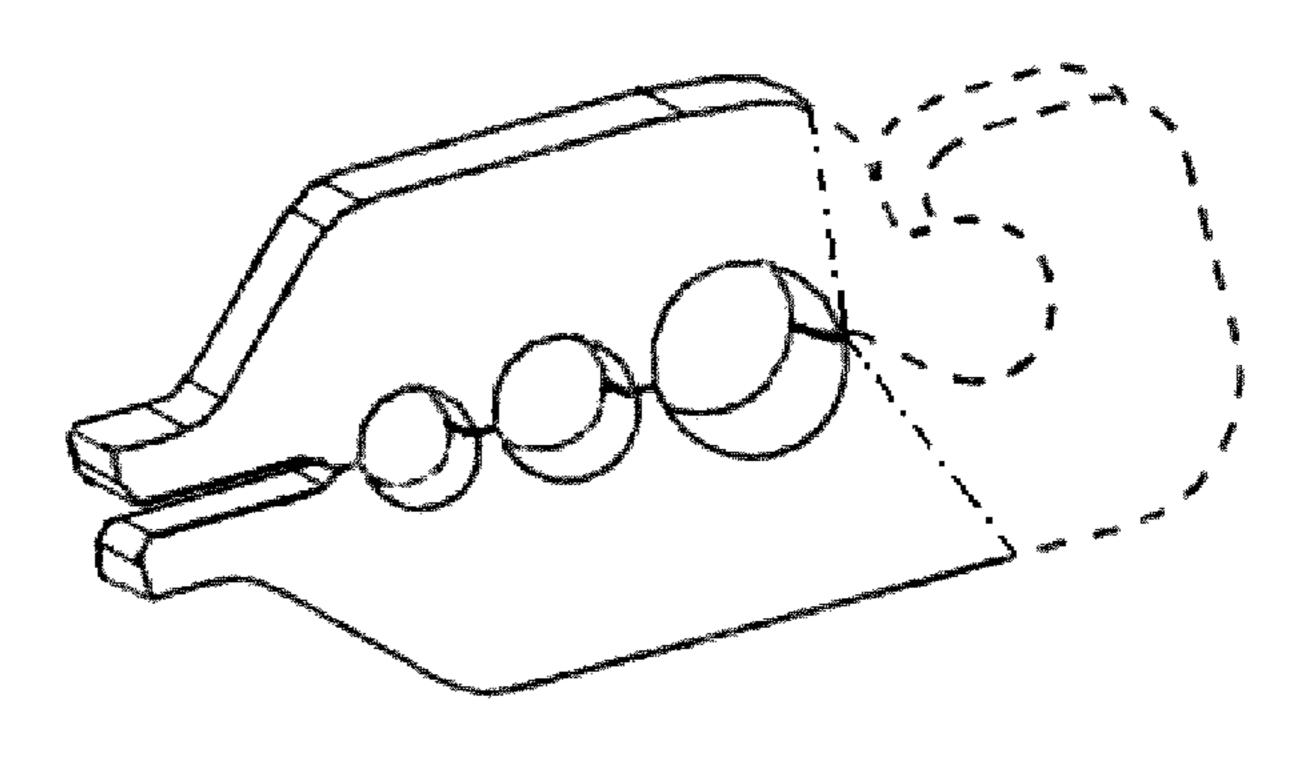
is a slightly different angle of the perspective view shown in FIG. 1 with the jaws of the tool in the closed position.
